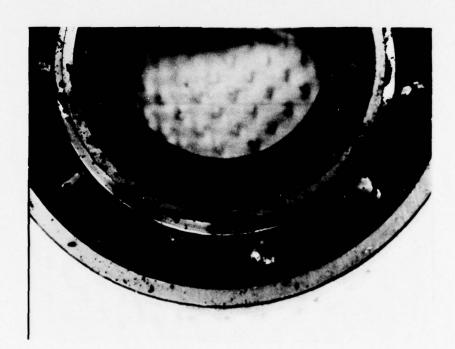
Bearing S/N TRL-9. Removed Position 8 With 8.8 Hours Time. 2.5x Enlarged View.
